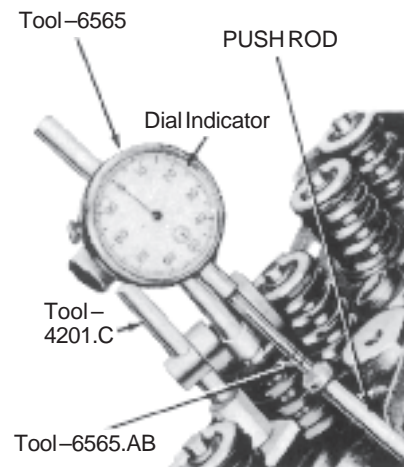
Testing Camshaft Lobe Lift-Rocker Shaft Mounted Rocker Arms
